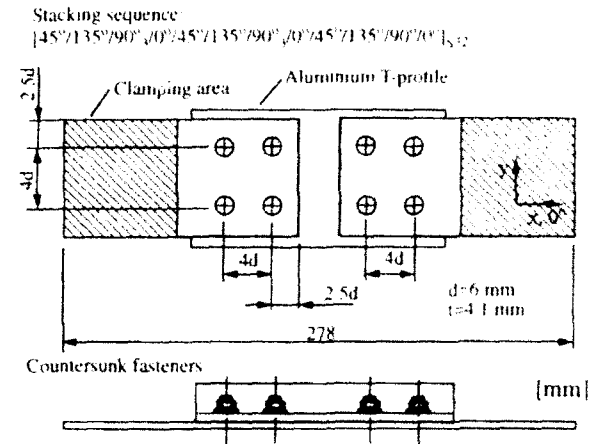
Specimen C: Tension loaded joint with two rows of fasteners.
